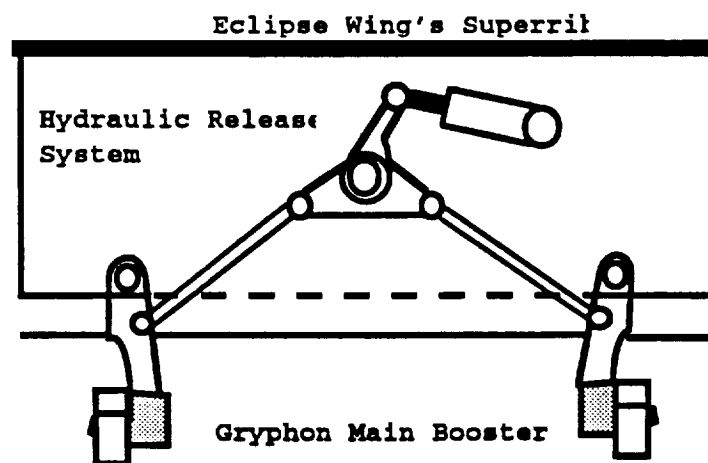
Side view layout of release mechanism geometry (before release)
